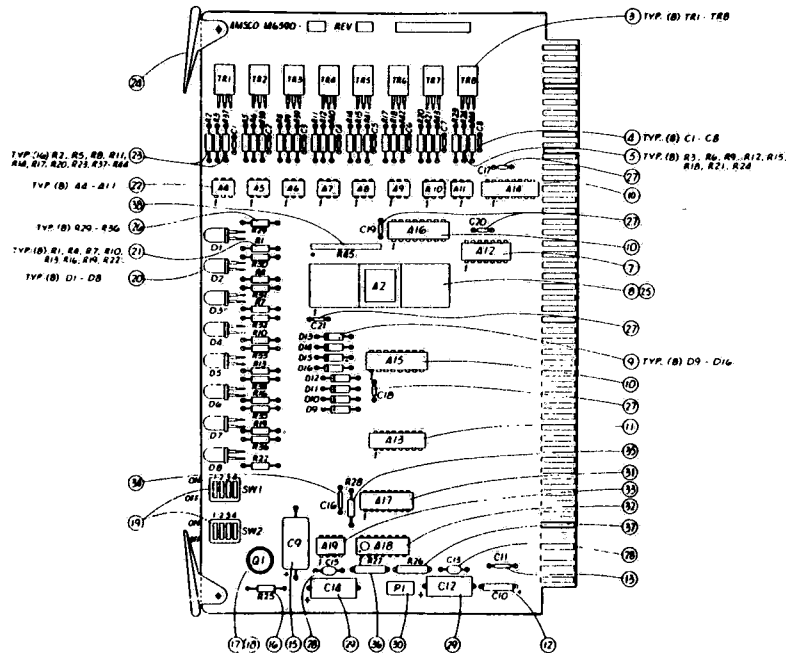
PRINTED CIRCUIT BOARD, Expander (Part 2 of 2).
